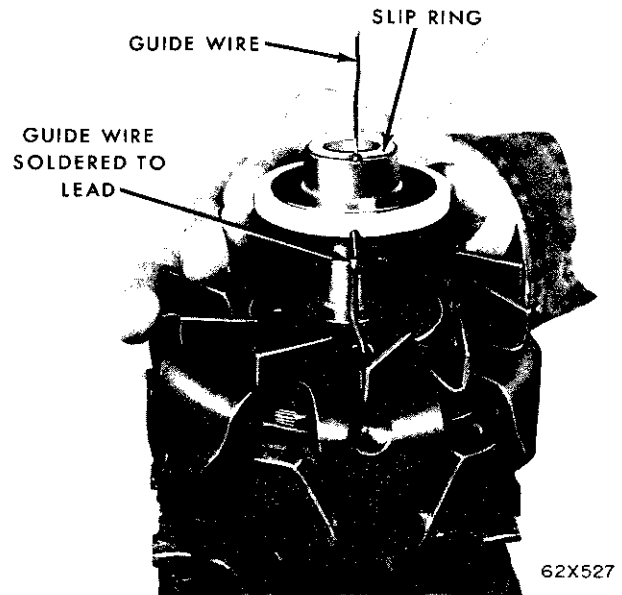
Aligning Slip Ring with Field Wire and Guide Wire
